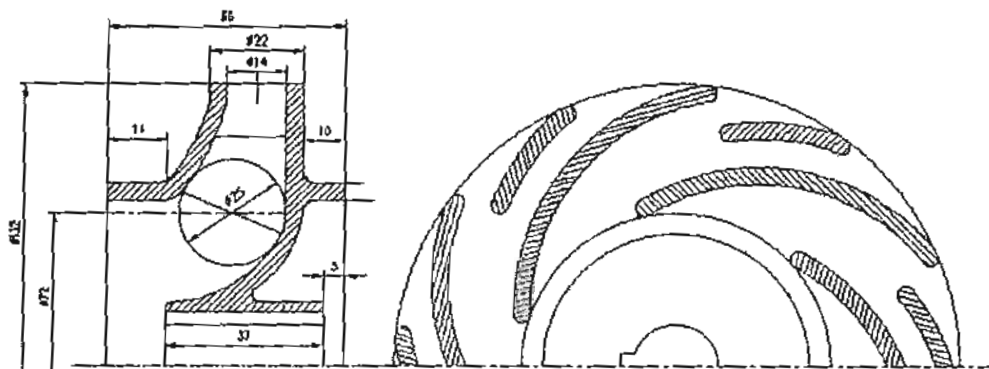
The dimensions of the principal impeller, Gölcü et al. [10]
